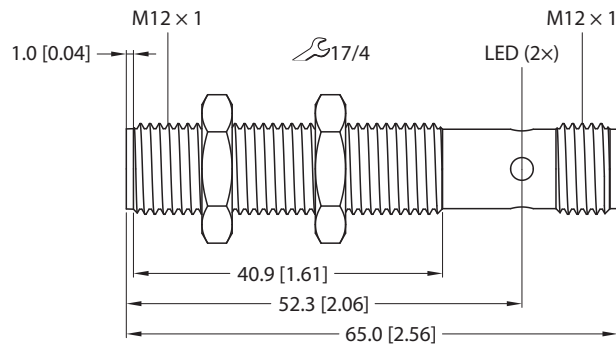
Dimensional drawing BI4-M12-2APS8X2-H1141
